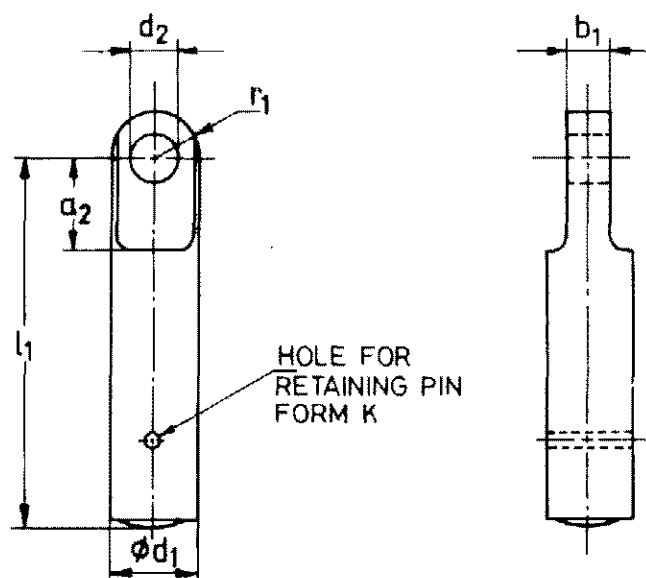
SHAPE OF GOOSENECK PIN, FORM GA
